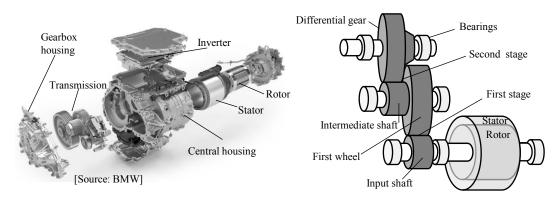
The considered automotive electric drive (left) and its schematic gearbox (right).
